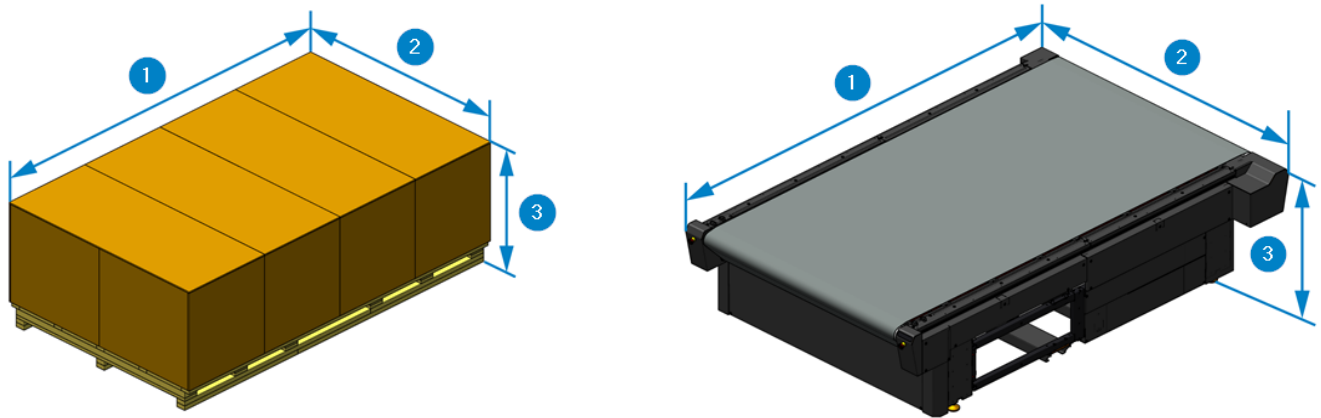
Crate (left) and Machine Frame (right) with Dimensions
